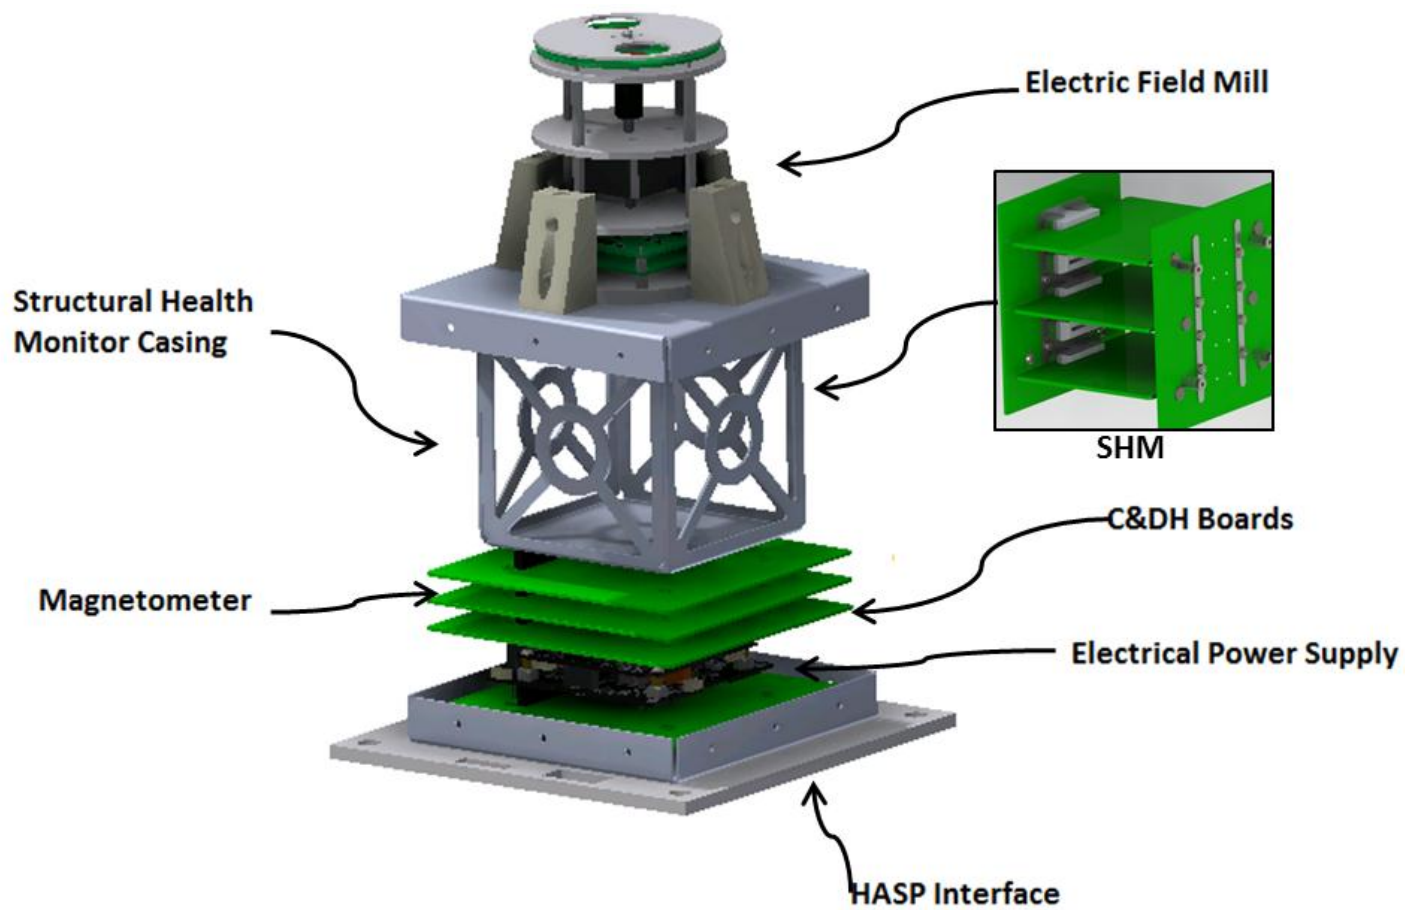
CAD Rendition of completed SPIFF payload on mounting surface with casing removed
